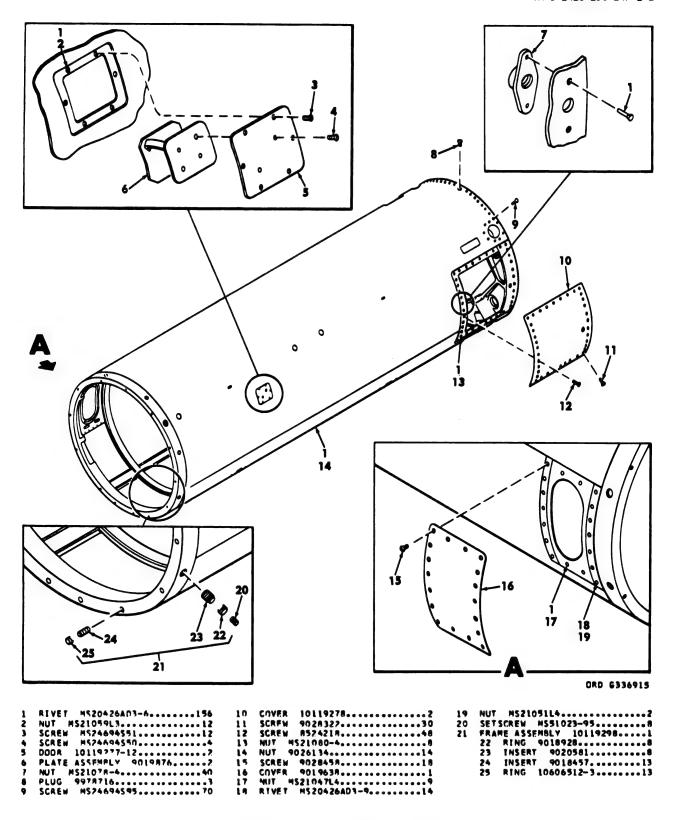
STRUCTURE ASSEMBLY, ENGINE SECTION /10119277/ /SEF FIGURE 158 FOR NEXT HIGHER ASSEMBLY/
